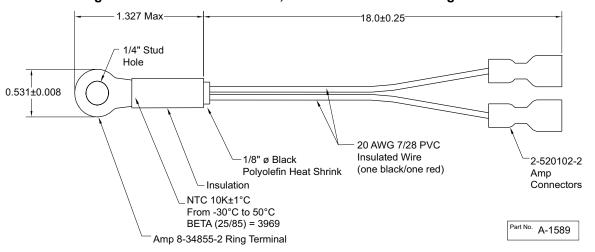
1193547 Dry Bulb and Mixed Air Sensor Wiring
